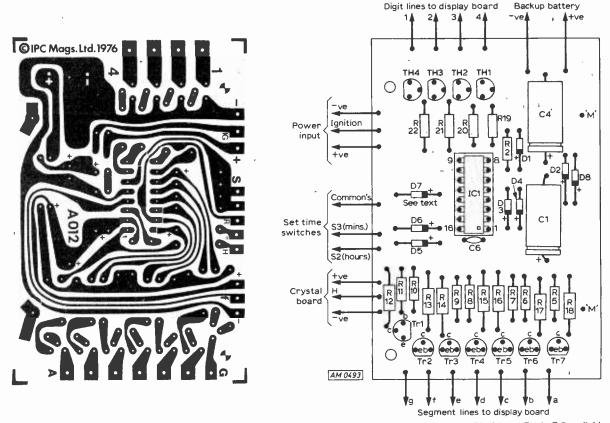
Clock PCB containing IC1, an AY-5-1224 12/24hr clock circuit. Also contained on this board are the LED drivers, Tr1 to Tr7, switching thyristors TH1 to TH4 and smoothing components. D7 is included for 24hr mode only.
